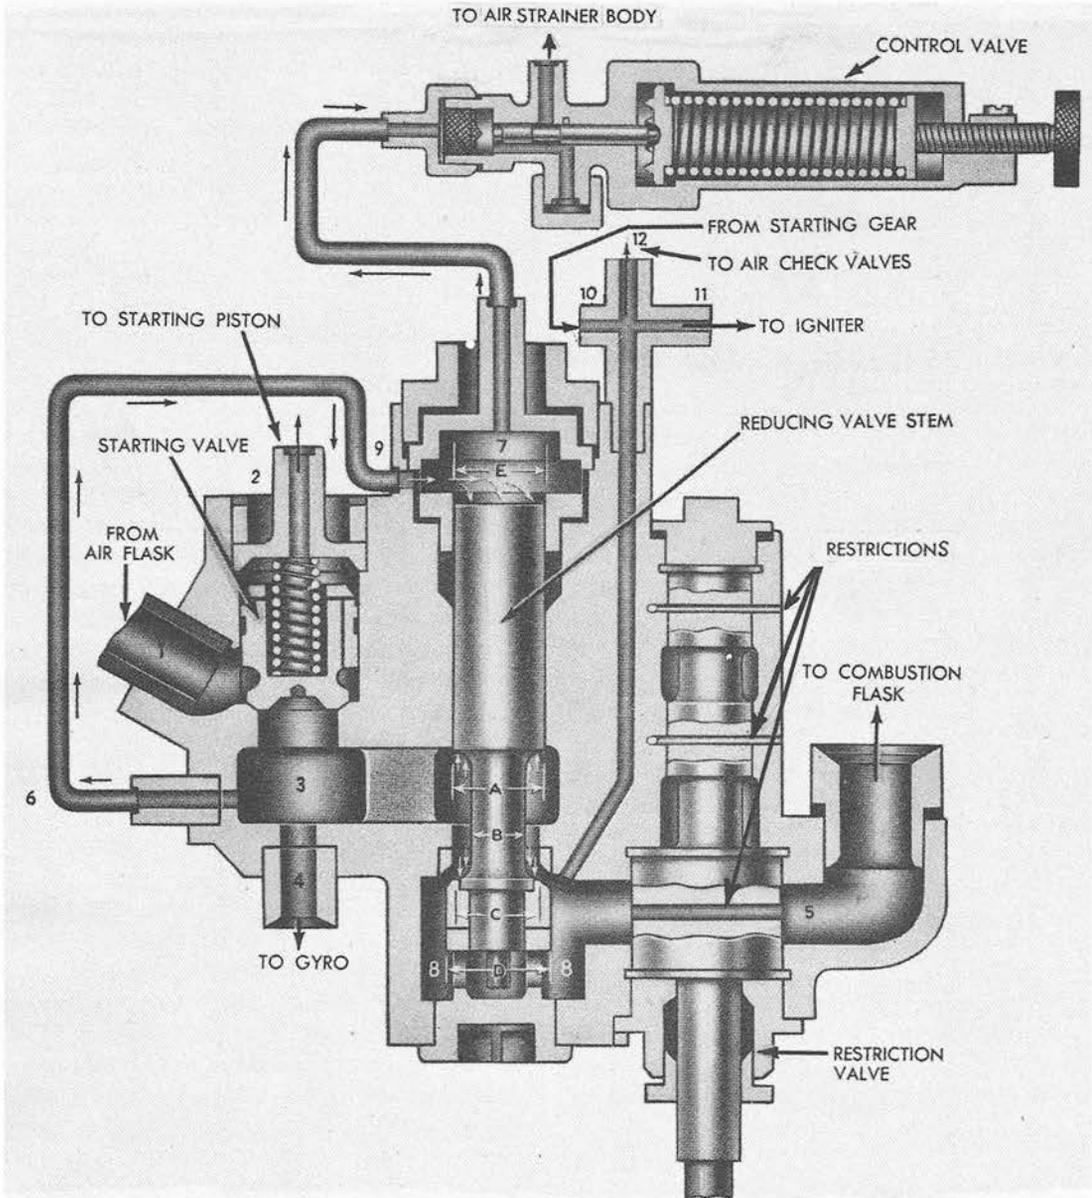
C14.—Starting and reducing valve groups with control valve.
